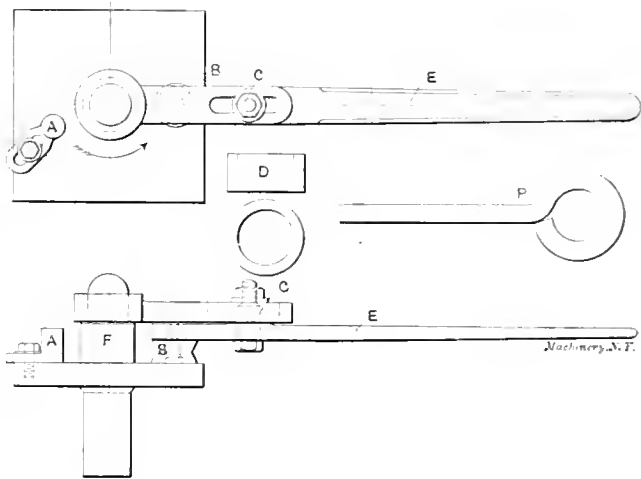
Tool for Forging Open Eyebolts or Hooks
